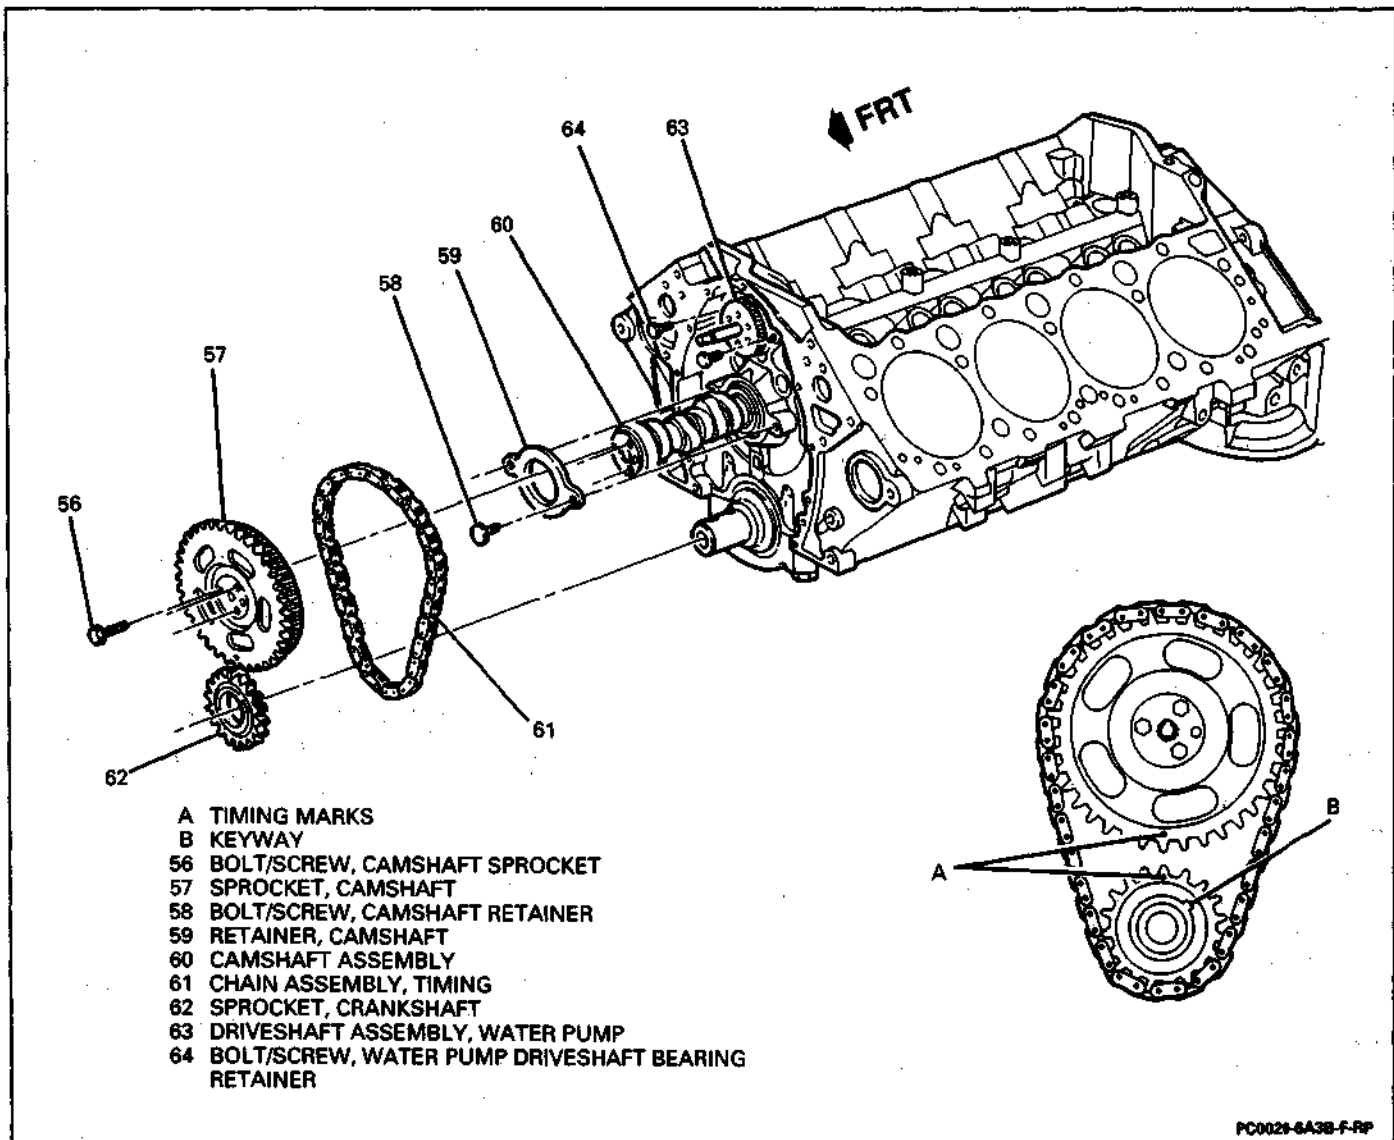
Camshaft Assembly, Sprockets and Water Pump Driveshaft Assembly
